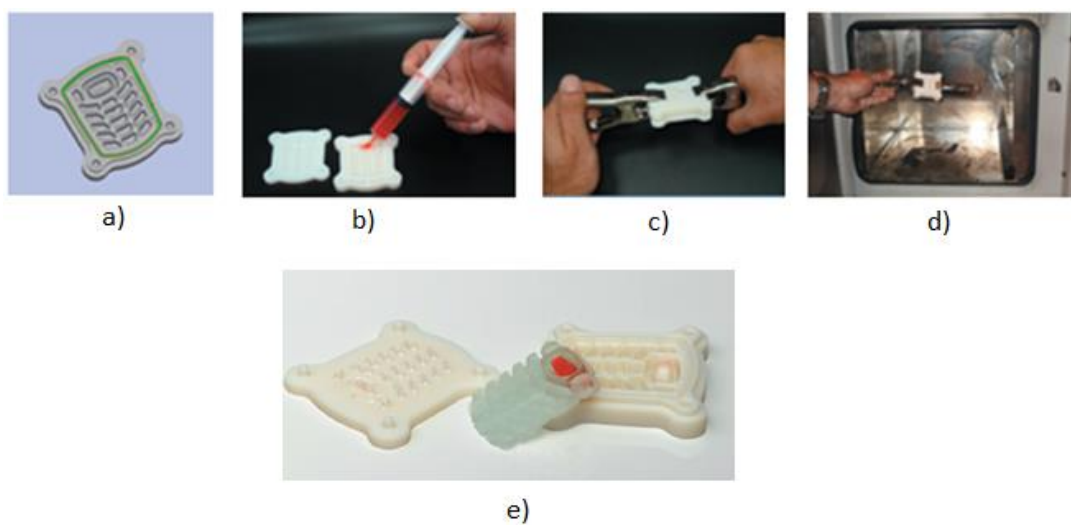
Direct tooling application using Polyjet technology and vacuum casting, adapted from Stratasys. [27]
